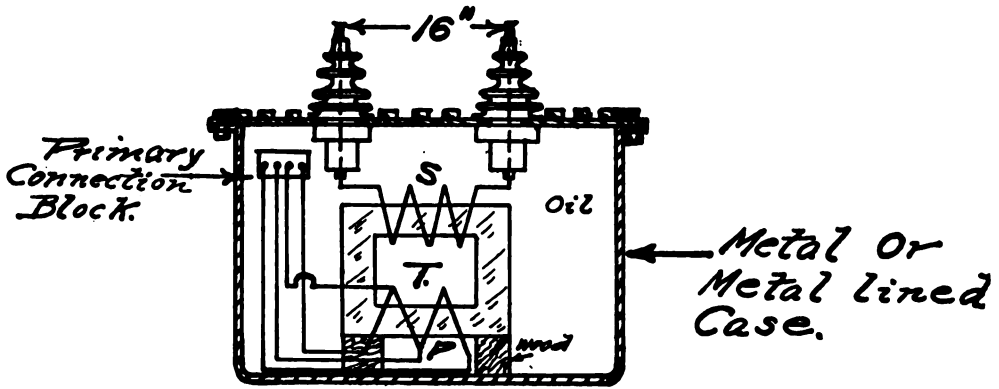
AN APPROVED METHOD OF MOUNTING THE TRANSFORMER IN A SUITABLE CONTAINER WHEN FINISHED
